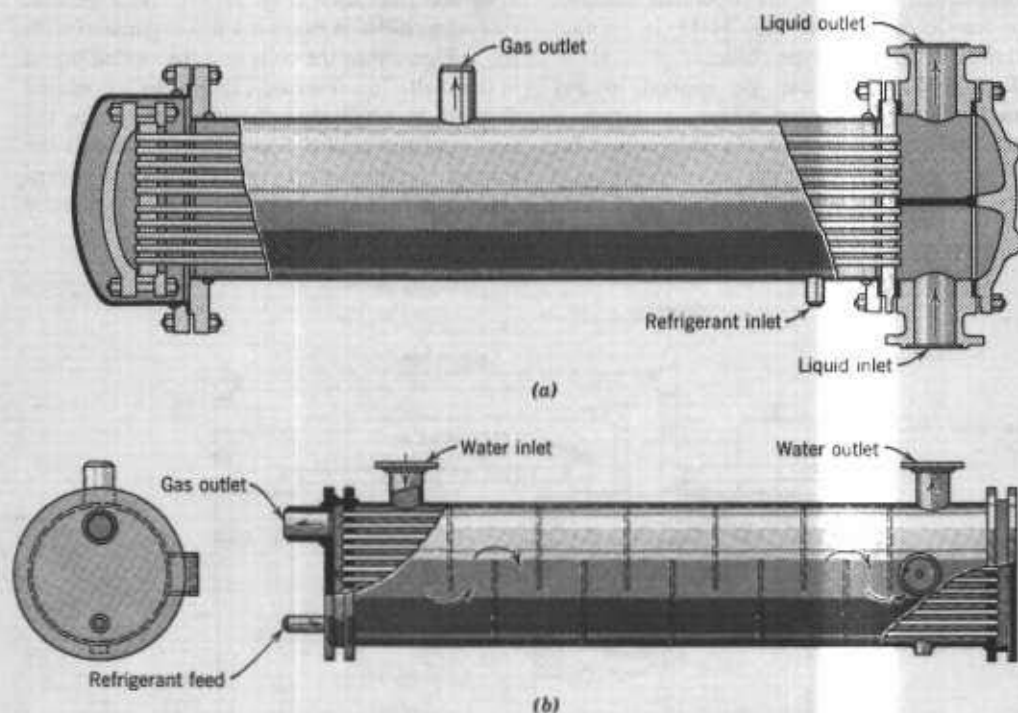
Typical shell-and-tube chillers. (a) Hooded type. Tube bundle is removable. (b) Dry-expansion type (refrigerant in tubes). Note baffling of water circuit. Tube sheets are fixed. (Courtesy Worthington Corporation.)
